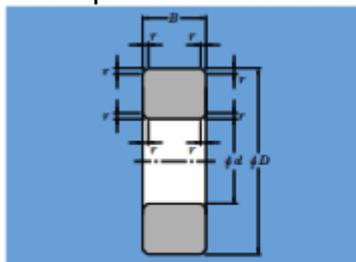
Radial bearings (excluding tapered roller bearings)
